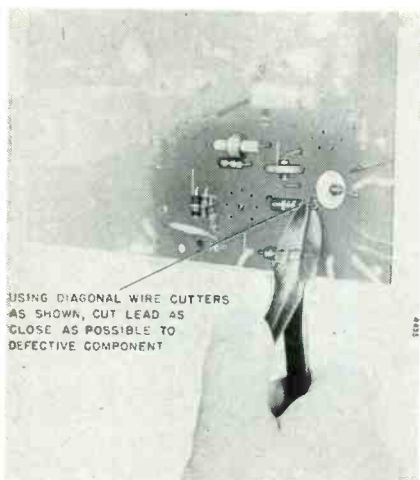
Cutting a defective resistor free of the printed circuit board.
